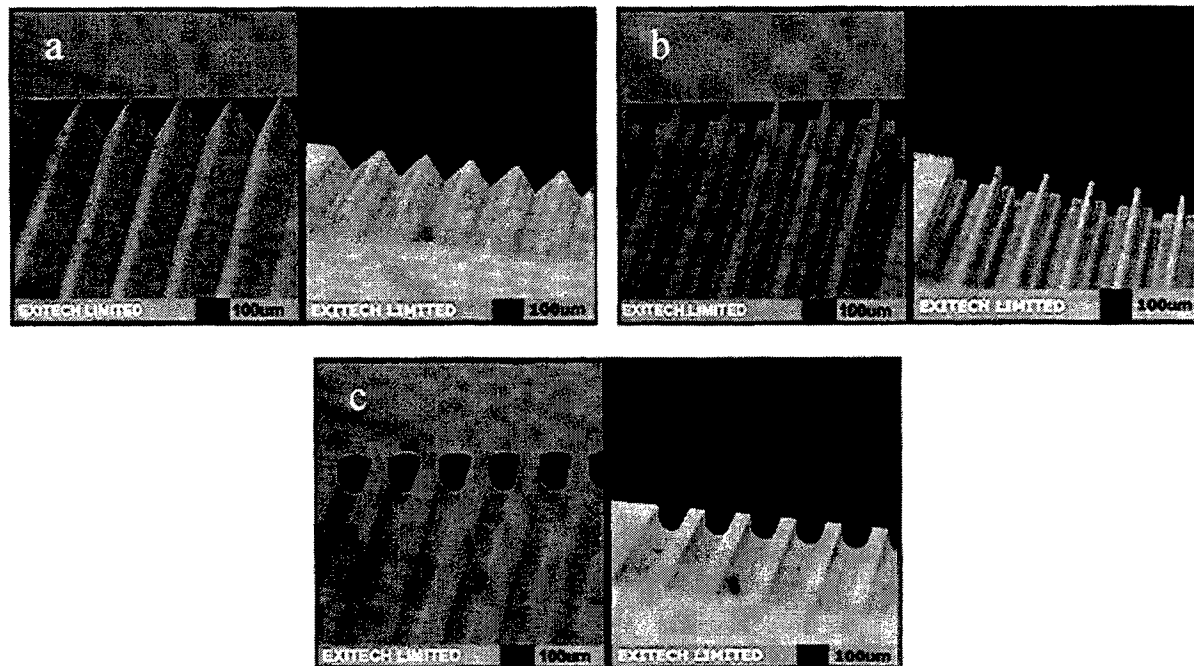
Shaped cross-section micro-channels produced using workpiece dragging technique.
